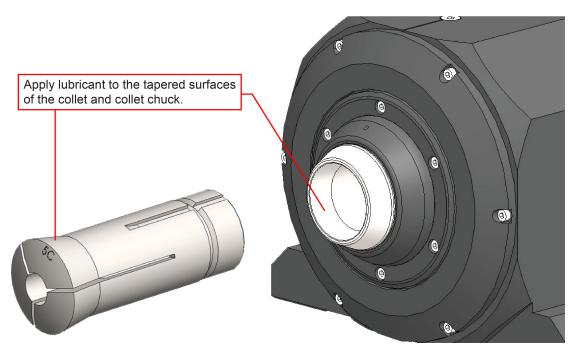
Collet and Collet Chuck Tapered Surfaces
